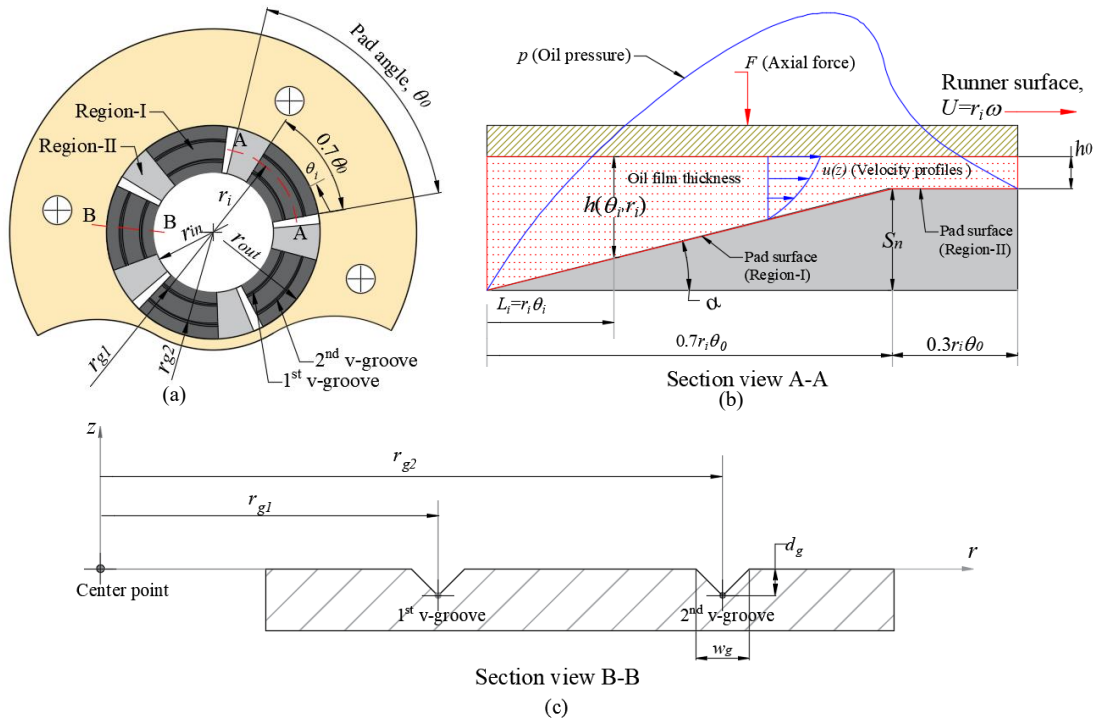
Thrust bearing geometry: (a) top view, (b) section view A-A, and (c) section view B-B
